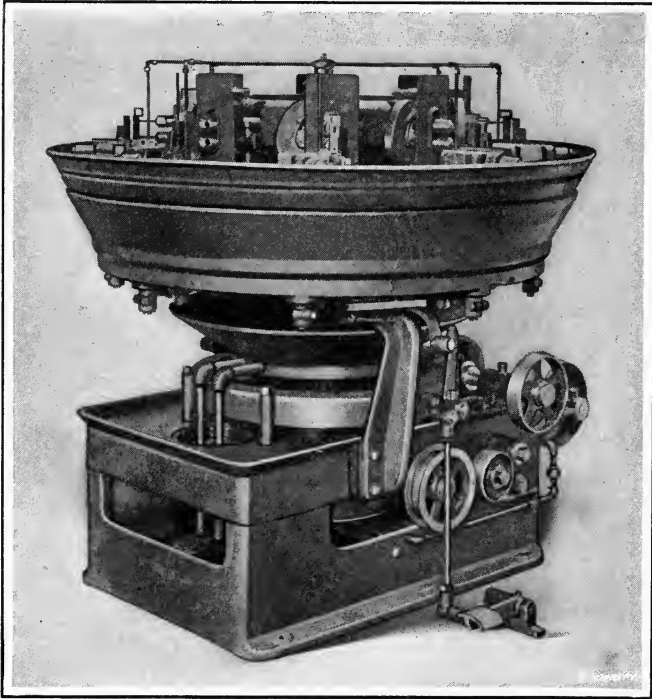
Semi-automatic Continuous-feed Drilling Machine equipped for Drilling Cotter-pin Holes
